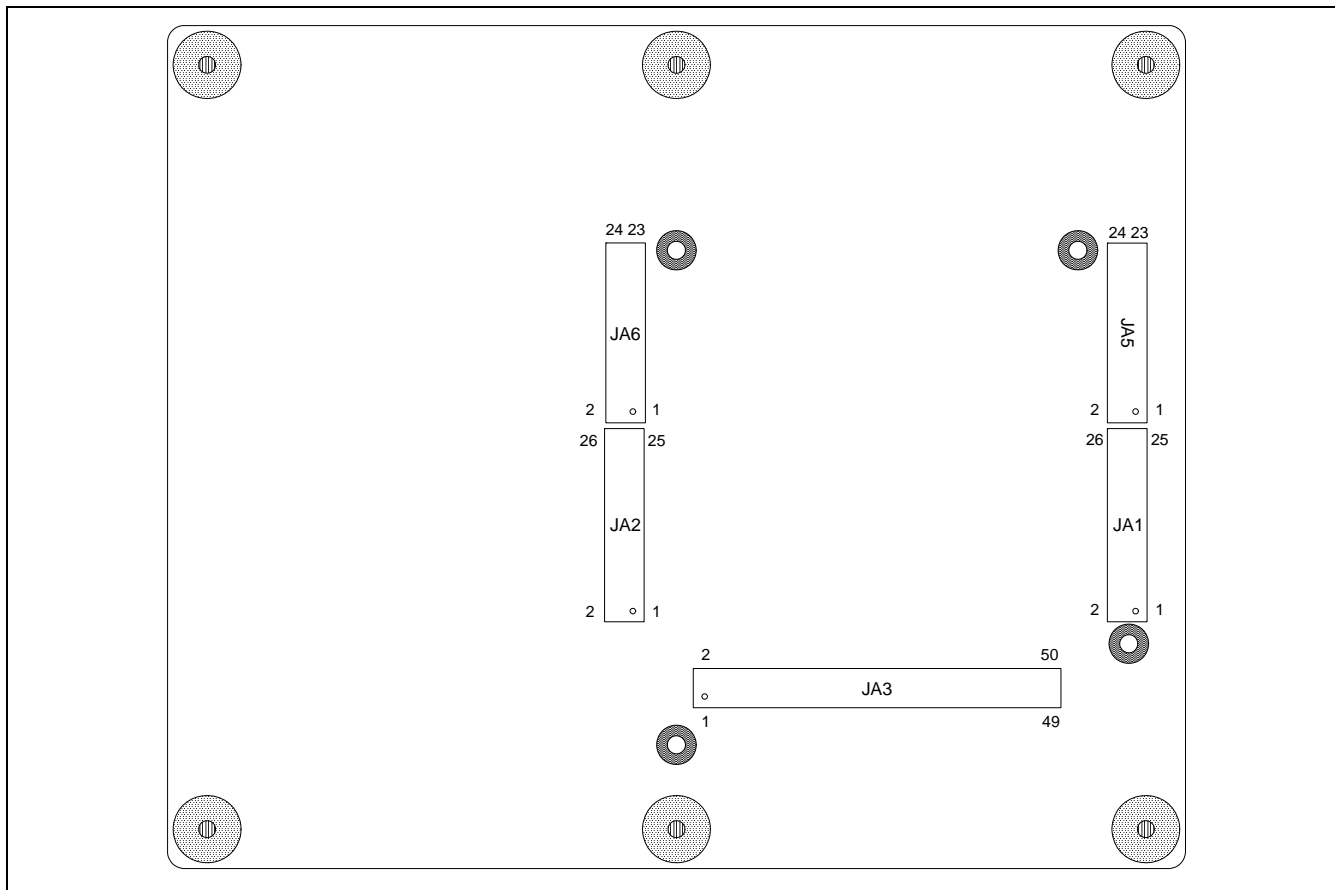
Application Header Pin Assignments (Top View of the Component Side)
